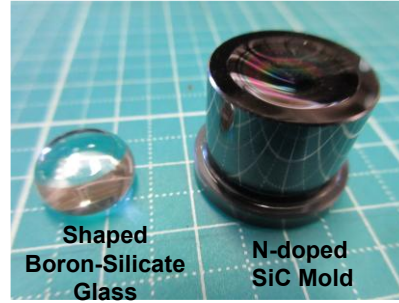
Mold-stamping of boron-silicate glass work with the use of meniscus SiC mold.
